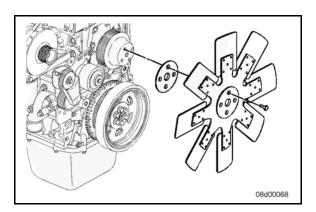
EXAMPLE OF FAN PULLEY REMOVAL
